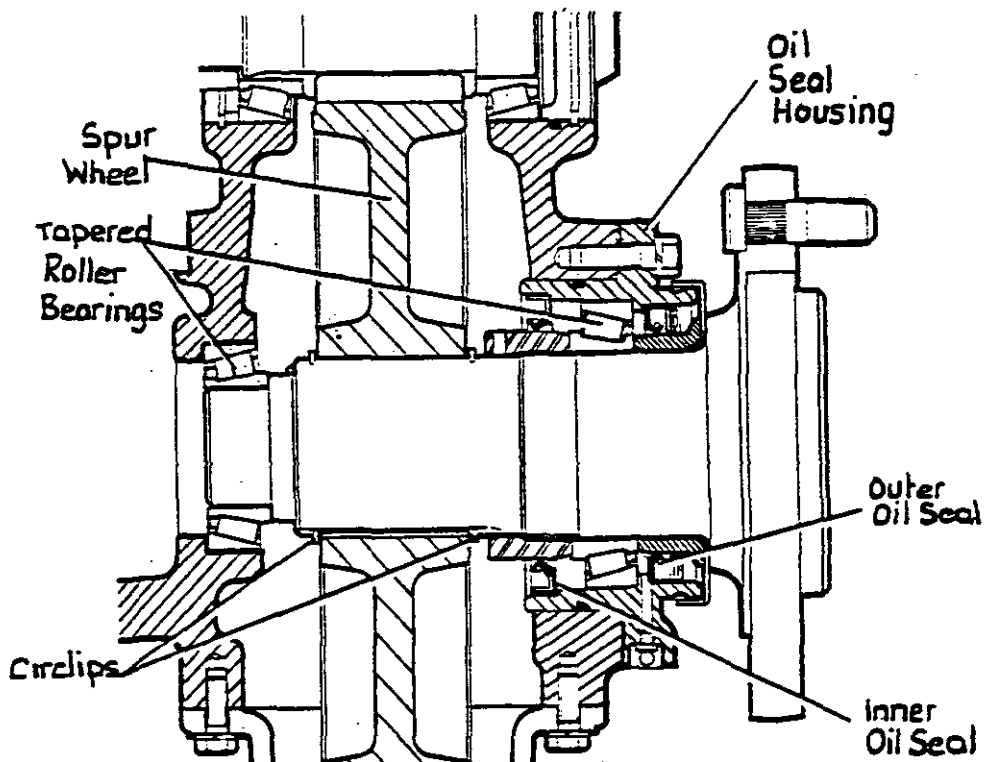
FINAL DRIVESHAFT AND BEARINGS
